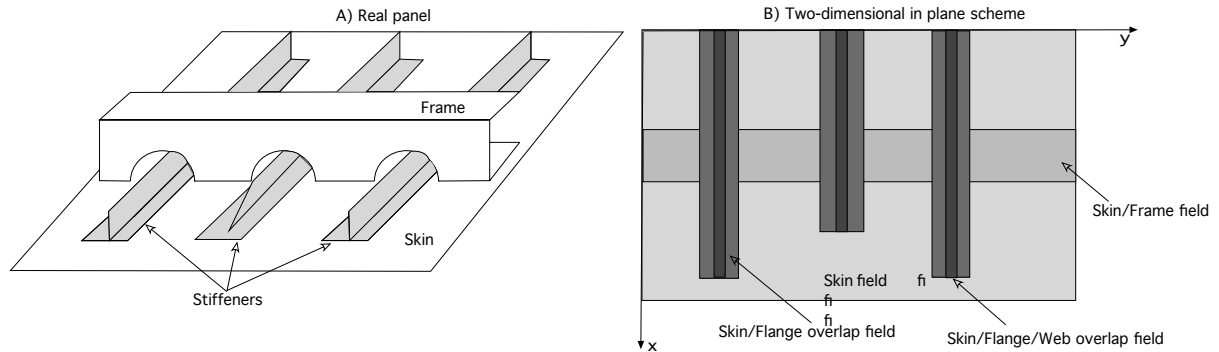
Example of the skin/stringers/frame multibay assembly. Left: realized structure; right: in-plane projections.
